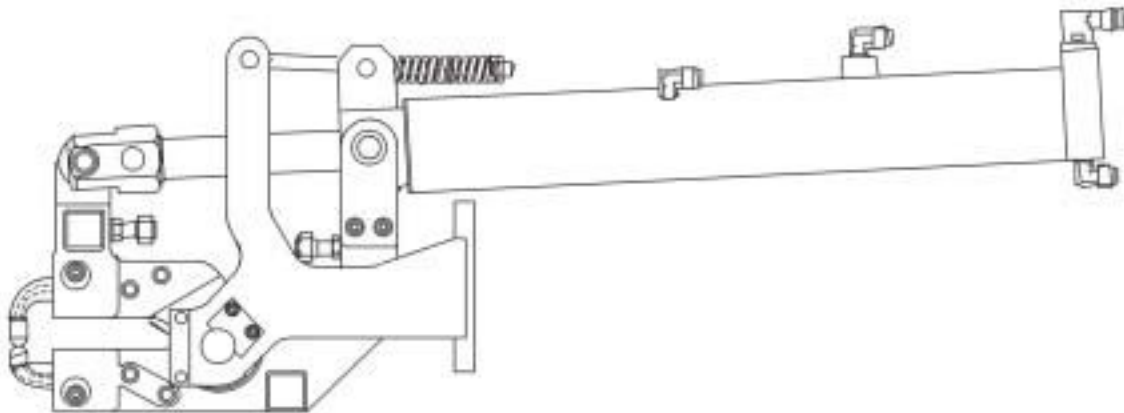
Fixture Style, Pinch-Type Gun wo/Transformer
